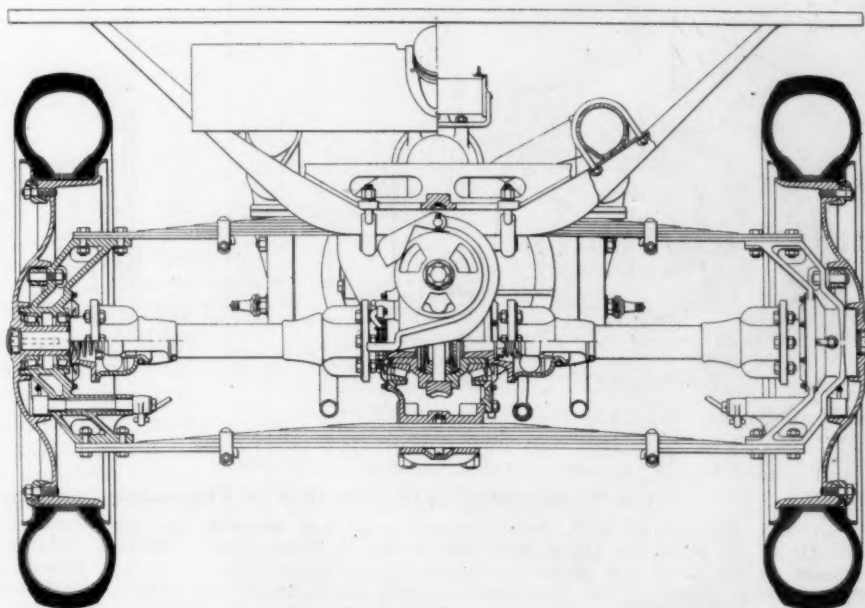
REAR SUSPENSION AND DRIVE ASSEMBLY
